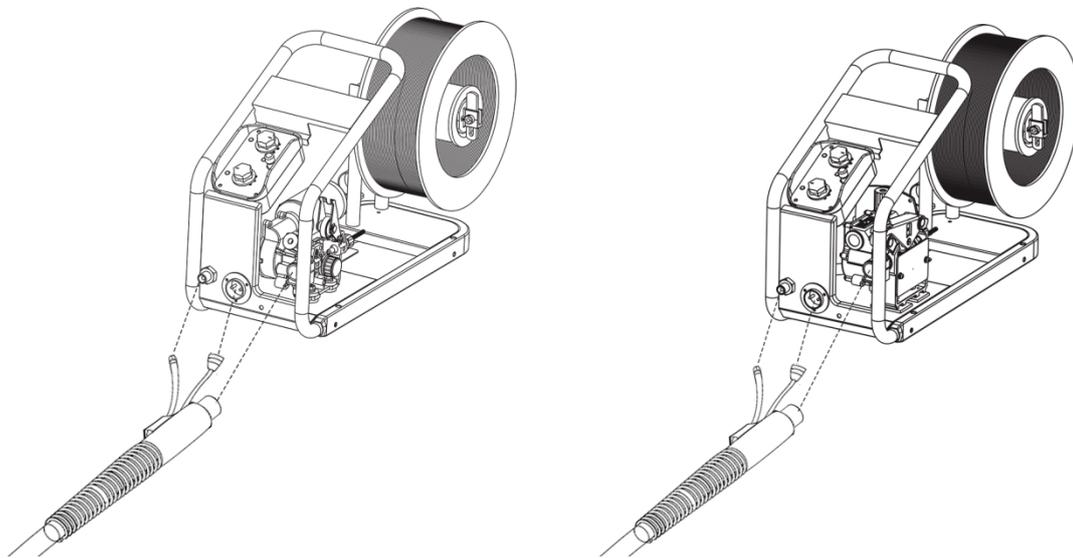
Connection diagram of welding torch of the open type manual wire-feeder
